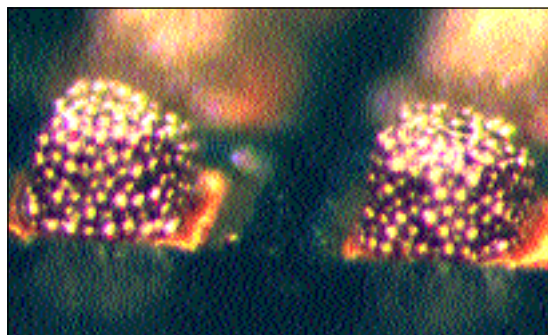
Printed Solder Paste on Attachment Pad BEG
